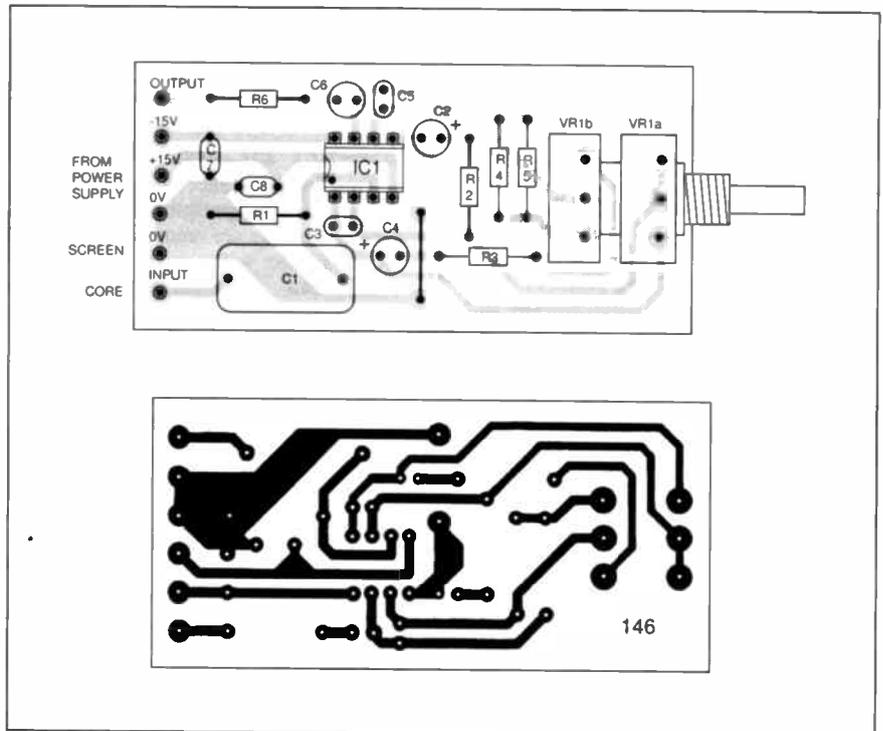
Input Amplifier printed circuit board component layout and full size copper foil master pattern.
